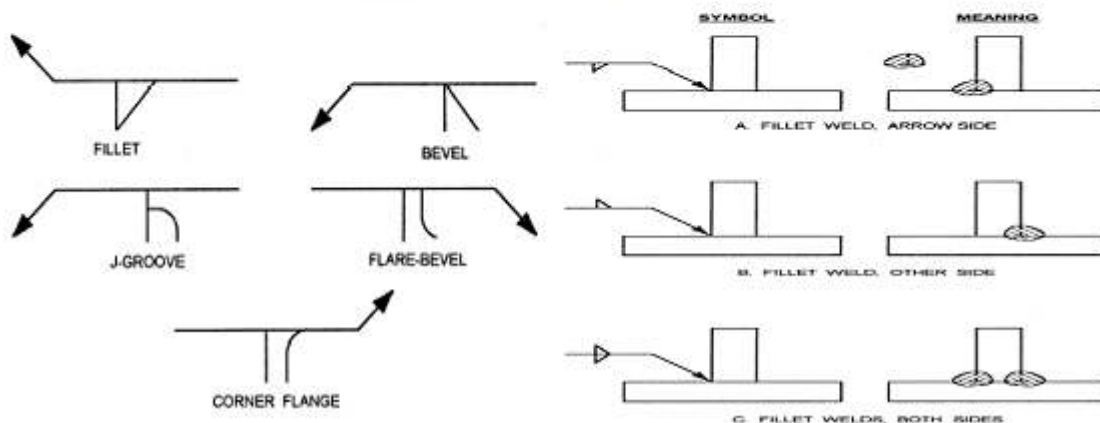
Weld symbols applied to reference line Specifying weld location
